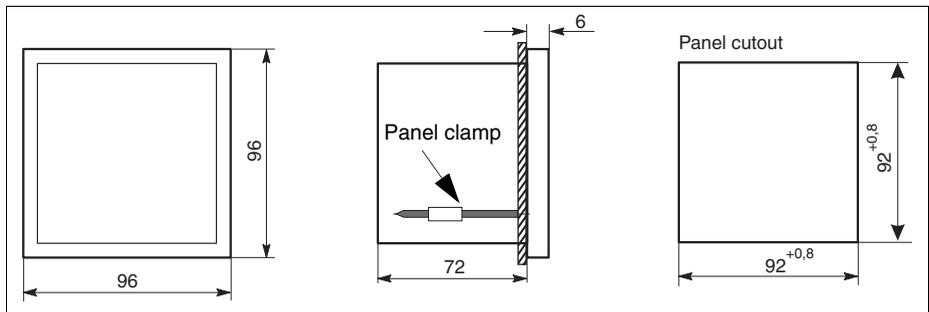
Dimension drawing display PTD50 (all dimensions in mm)
